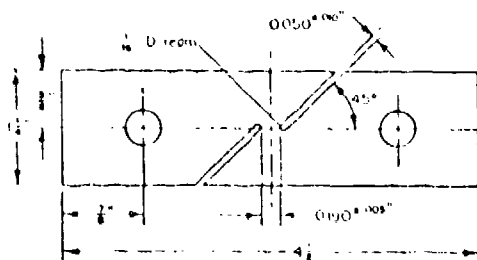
SHEET SHEAR TEST SPECIMEN
